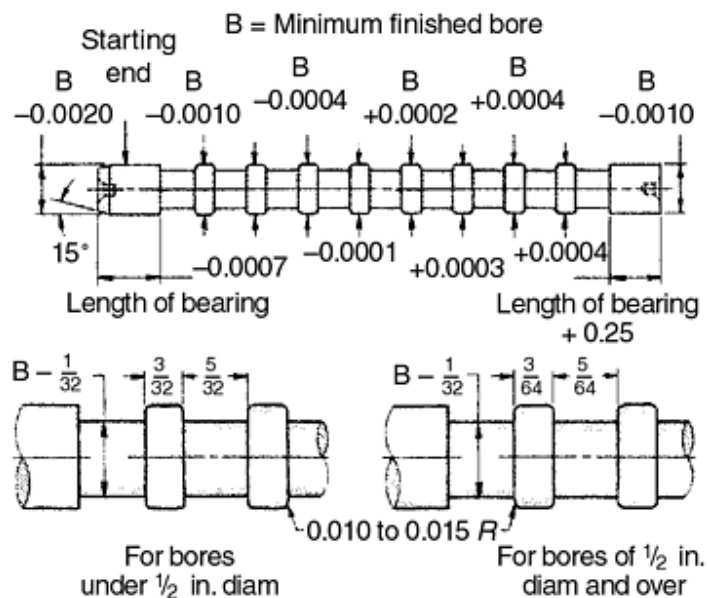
Ball broach for burnishing bores in P/M parts. Dimensions given in inches
